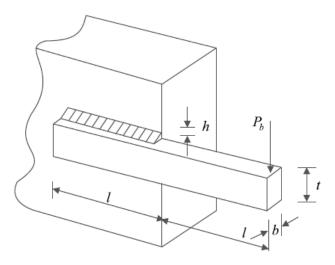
Schematic view of the welded beam design problem.
